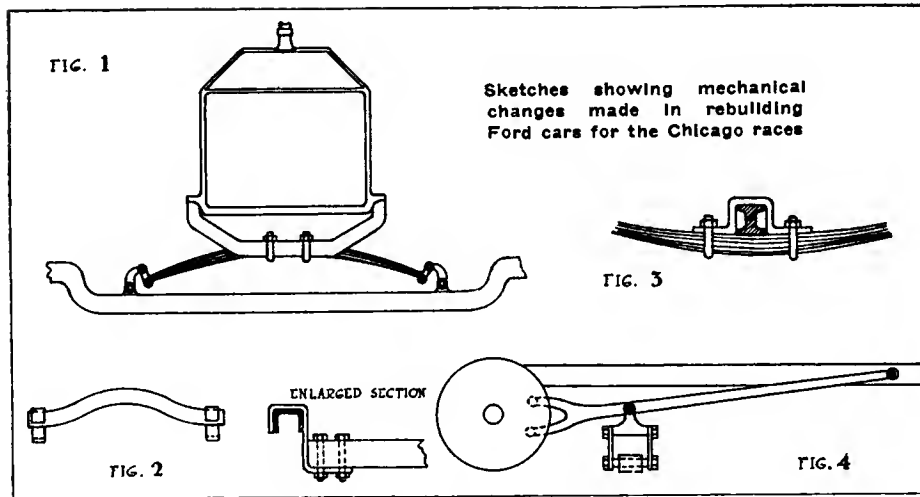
, he sawed off 4 in. from the frame on each side and suspended the regular Ford rear-spring hanger on two goosenecks made out of flat bar steel. This gave him a frame 4 in. lower than is found in the stock Ford. He also used Bosch for ignition and the carbureter is a Rayfield.
